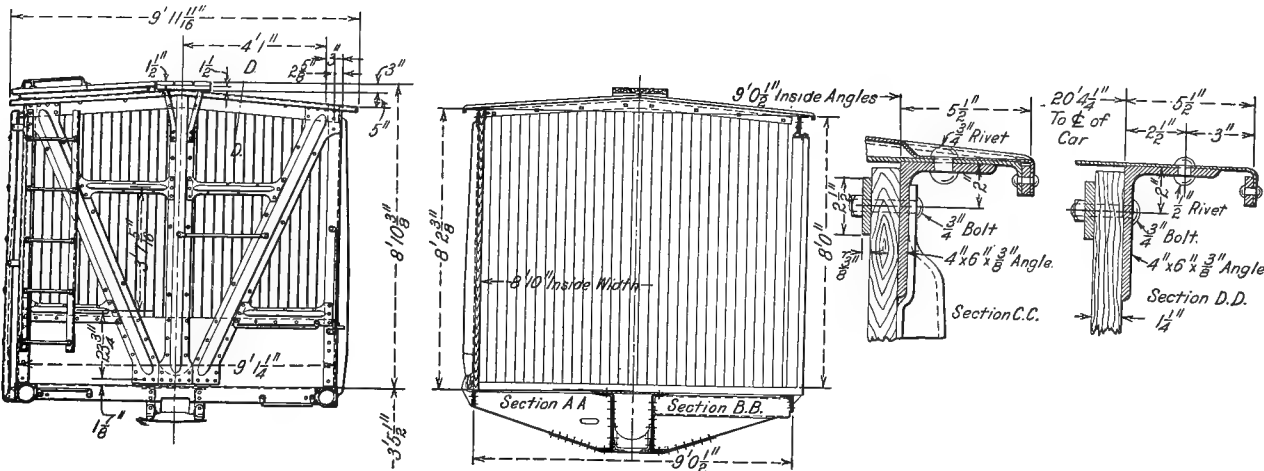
End Elevation and Cross Sections of Pennsylvania Steel Frame 50-Ton Capacity Box Car. The Dotted Lines at Top of Section "CC" Show Opening in Steel Roof Extending Between Car-lines for Ventilation. See also Figs. 274 and 276.
